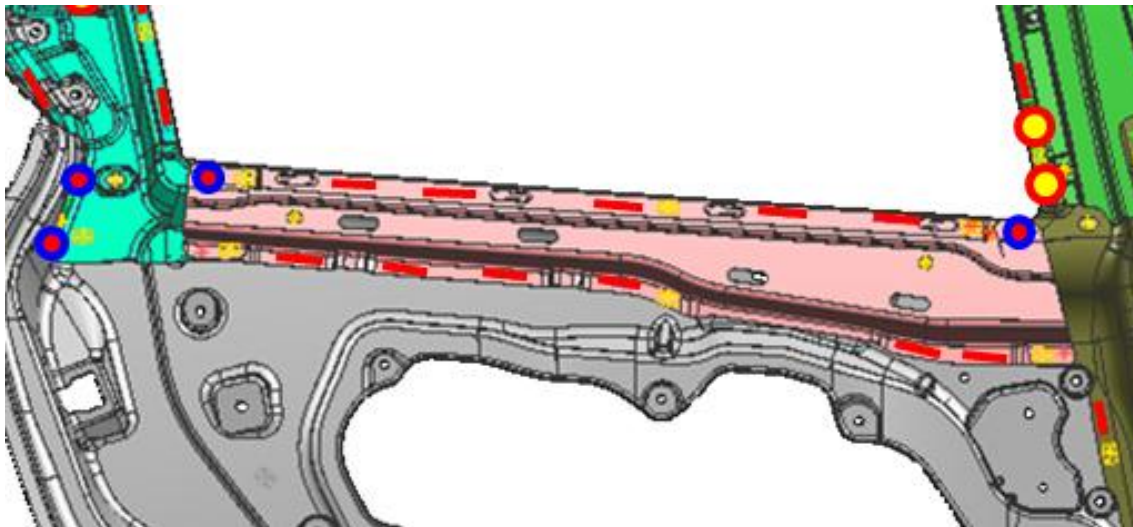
Welding stitches between inner frame and waist reinforce
